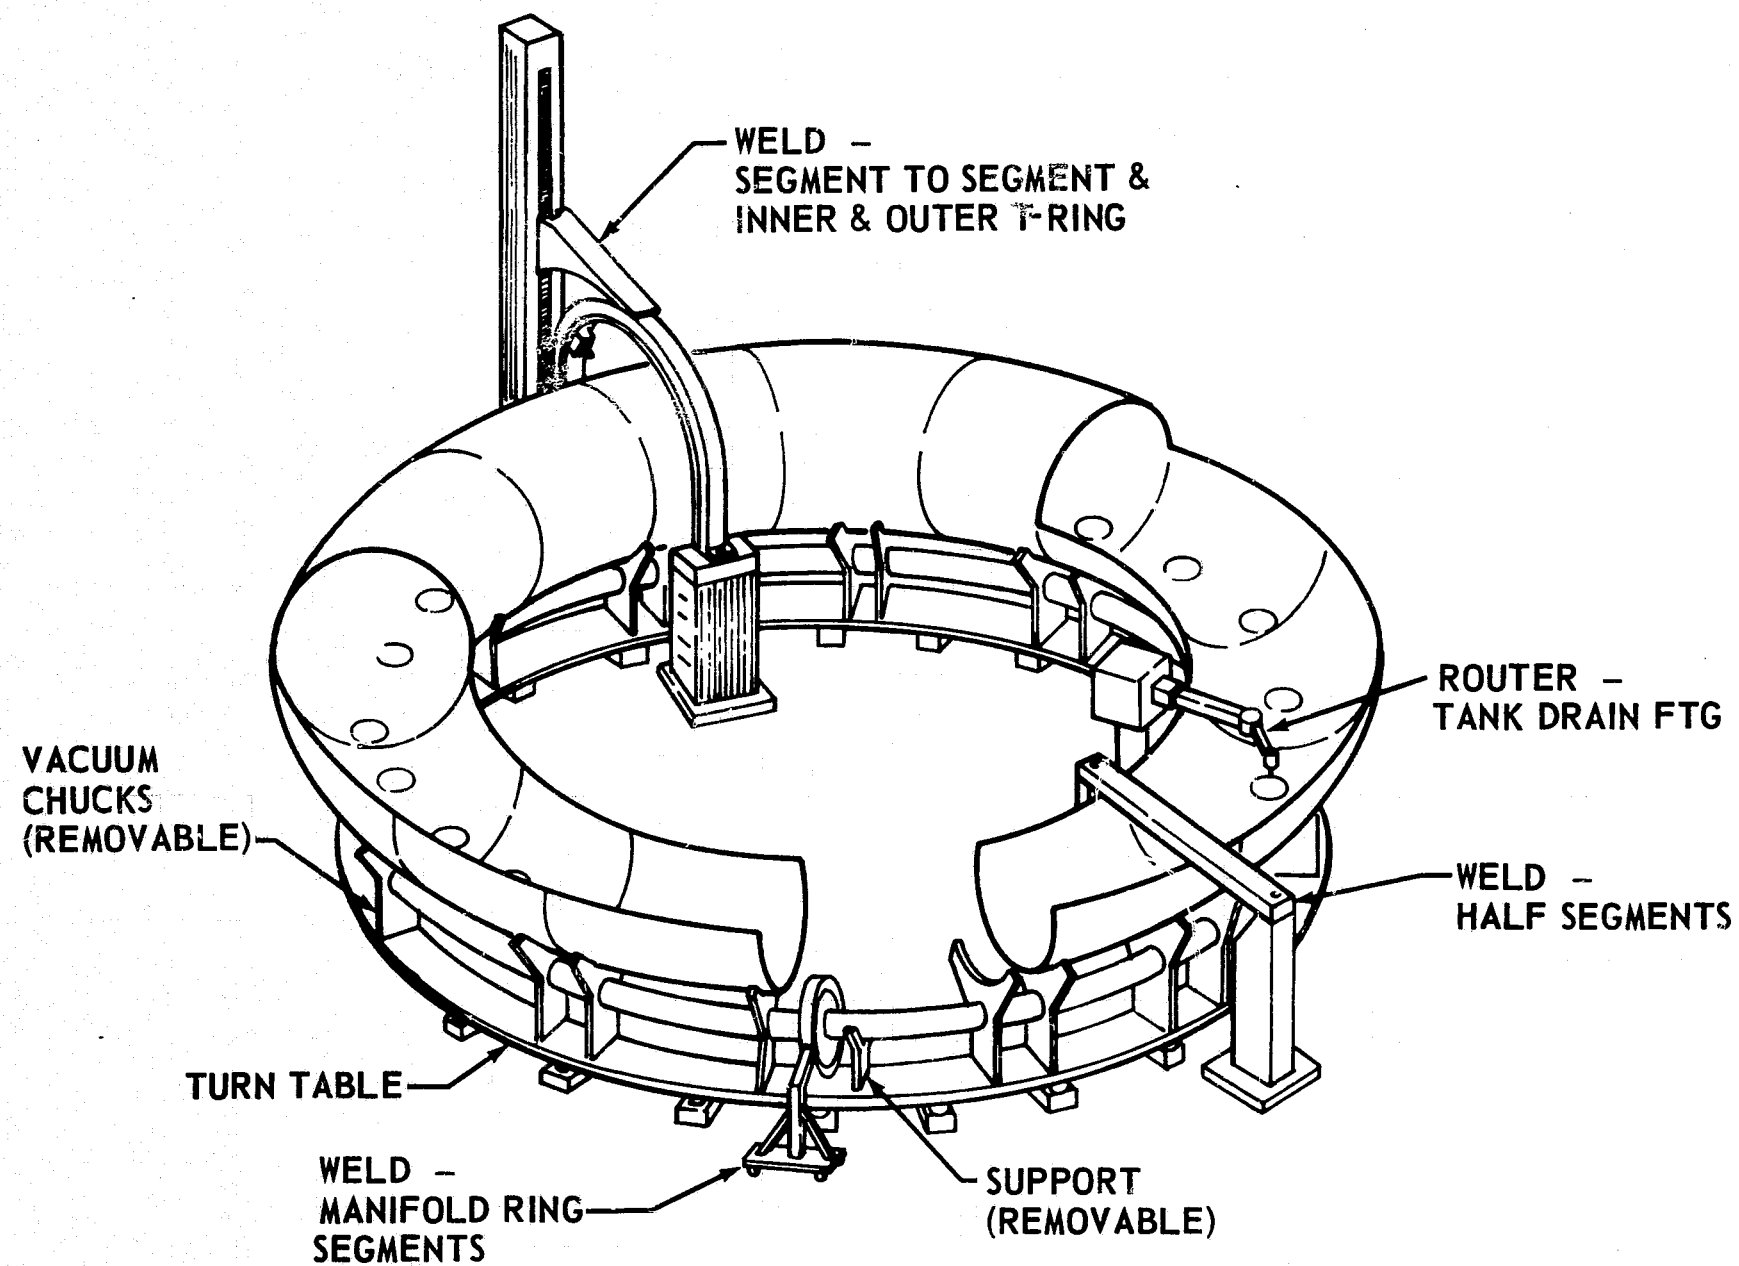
LH₂ TANK ASSEMBLY
